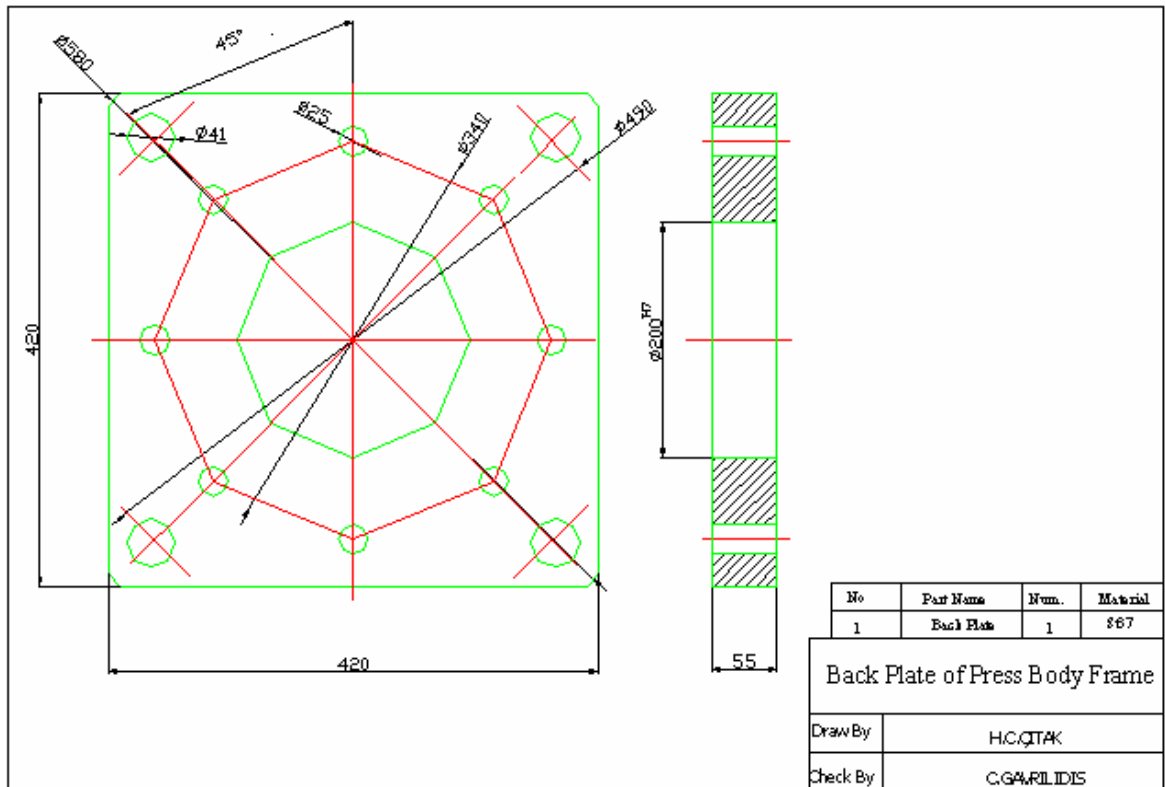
Back plate of press body frame (Hydraulic cylinder holder)
